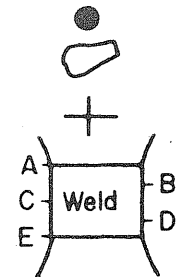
FRACTURE SURFACE, AND ULTRASONIC INDICATIONS RECORDED FOR SPECIMEN ND-10
